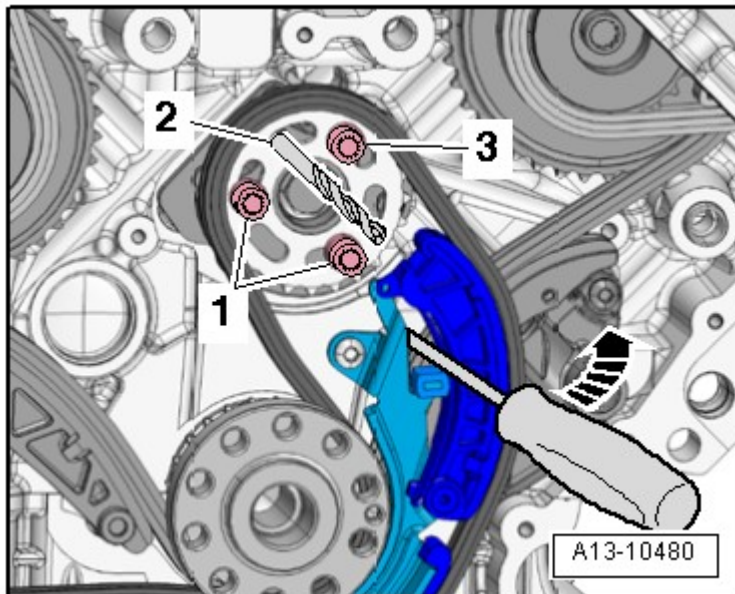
Securing Balance Shaft Using An 8 Mm Dia. Drill Bit At "TDC"
